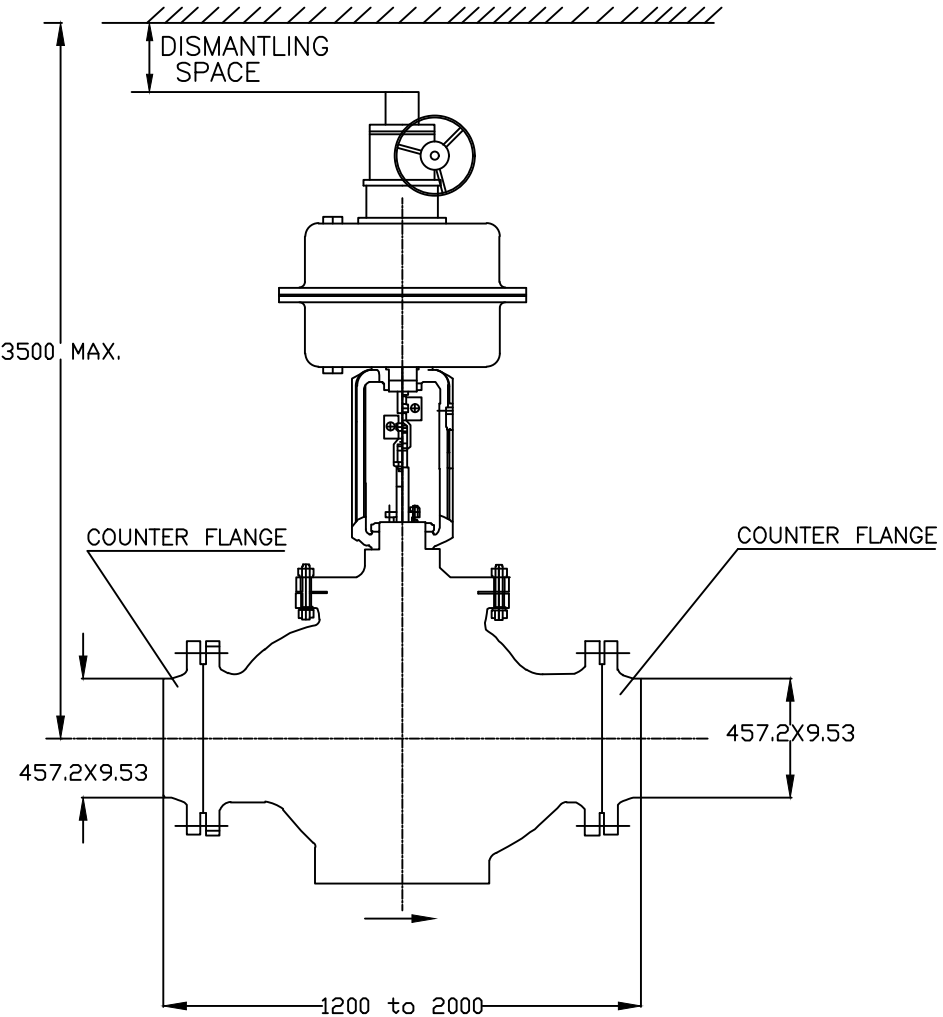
PROPOSED ARRANGEMENT OF LEAKEGE STEAM CONTROL VALVE (REFER SH.2, T.R. 1.3)
